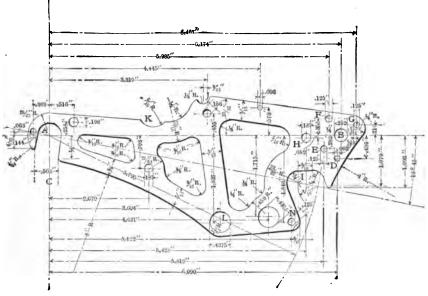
A PIECE AS LAID OUT AND DRILLED
